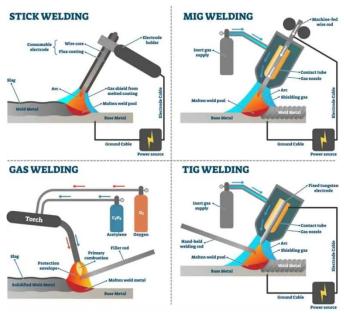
Welding methods (source: https://toolshaven.com)
